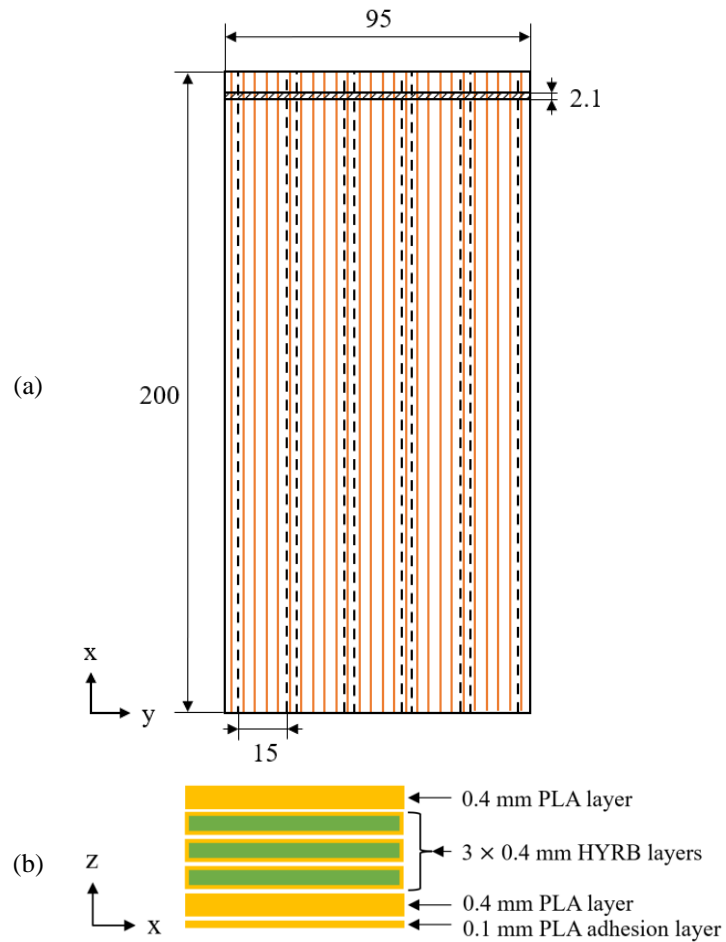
HYRB-based printed plate design for machining a set of five specimens with (a) plate geometry and dimensions expressed in millimeters and (b) stacking sequence of the biocomposite. Orange lines represent the deposition orientation along the length of the plate. Dashed lines represent the machining paths after plate printing.
